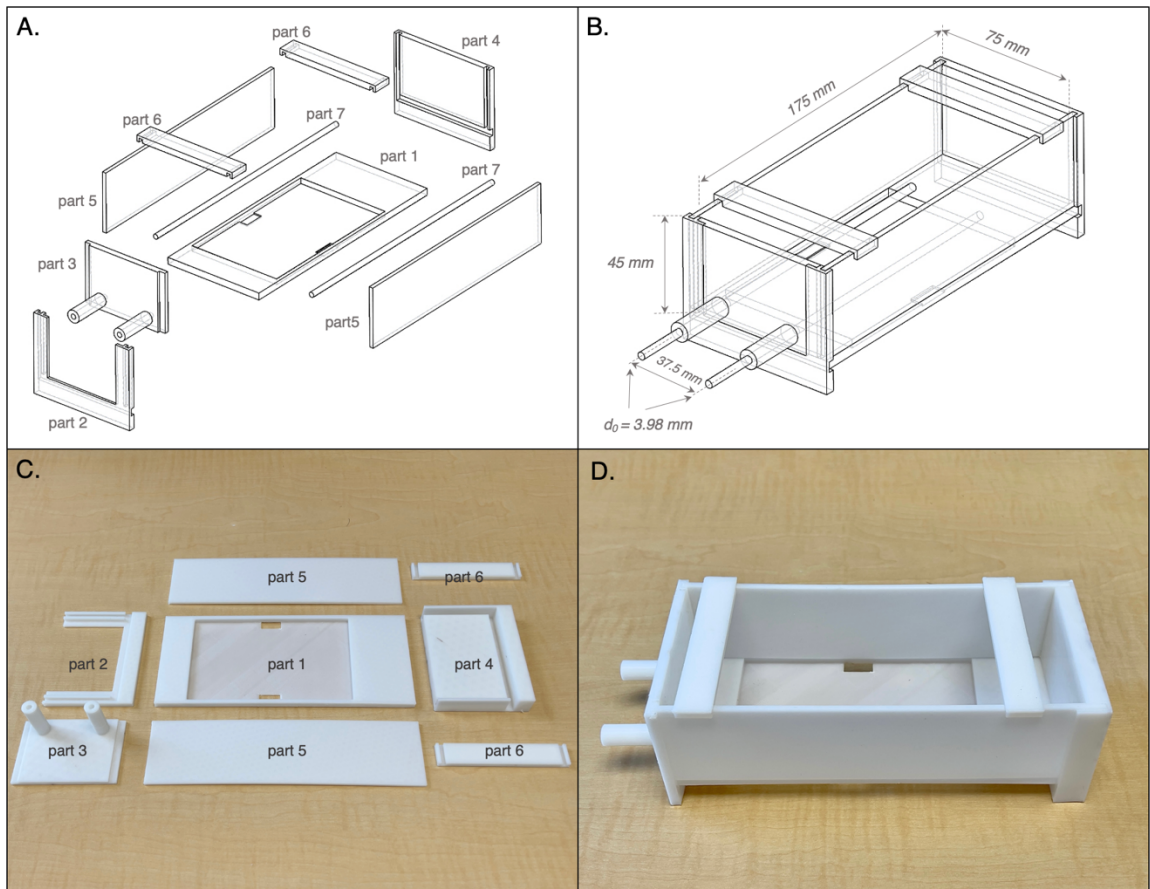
Mould for two-arteries model: (A) 3D schematics of the separated moulds (parts 1-6) and the metal rod (part 7); (B) 3D schematics of the assembled mould; (C) 3D printed parts; (D) 3D printed assembled mould.
